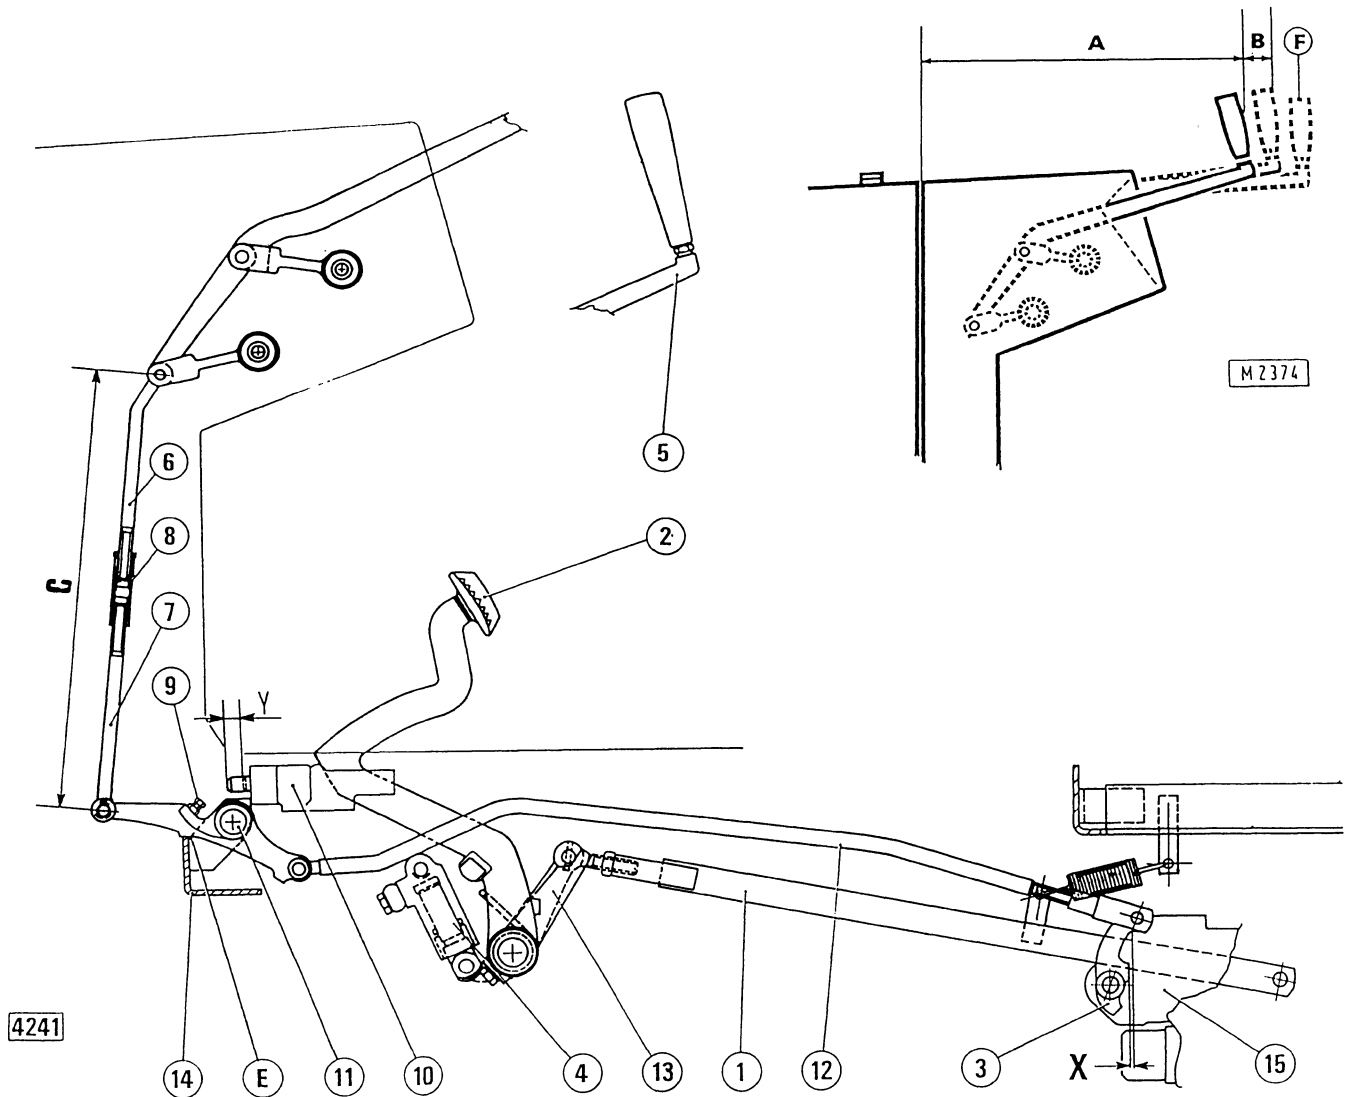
Brake and steering clutch linkage adjustment (with combined steering clutch/brake control).
